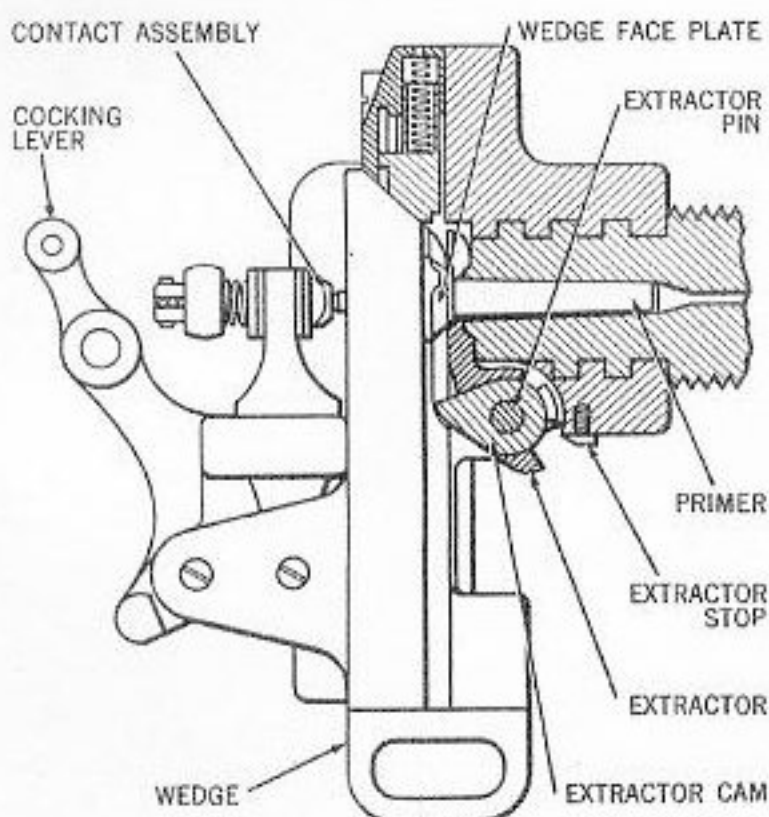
Firing Lock, Right Side, Sectional View - Wedge Closed
